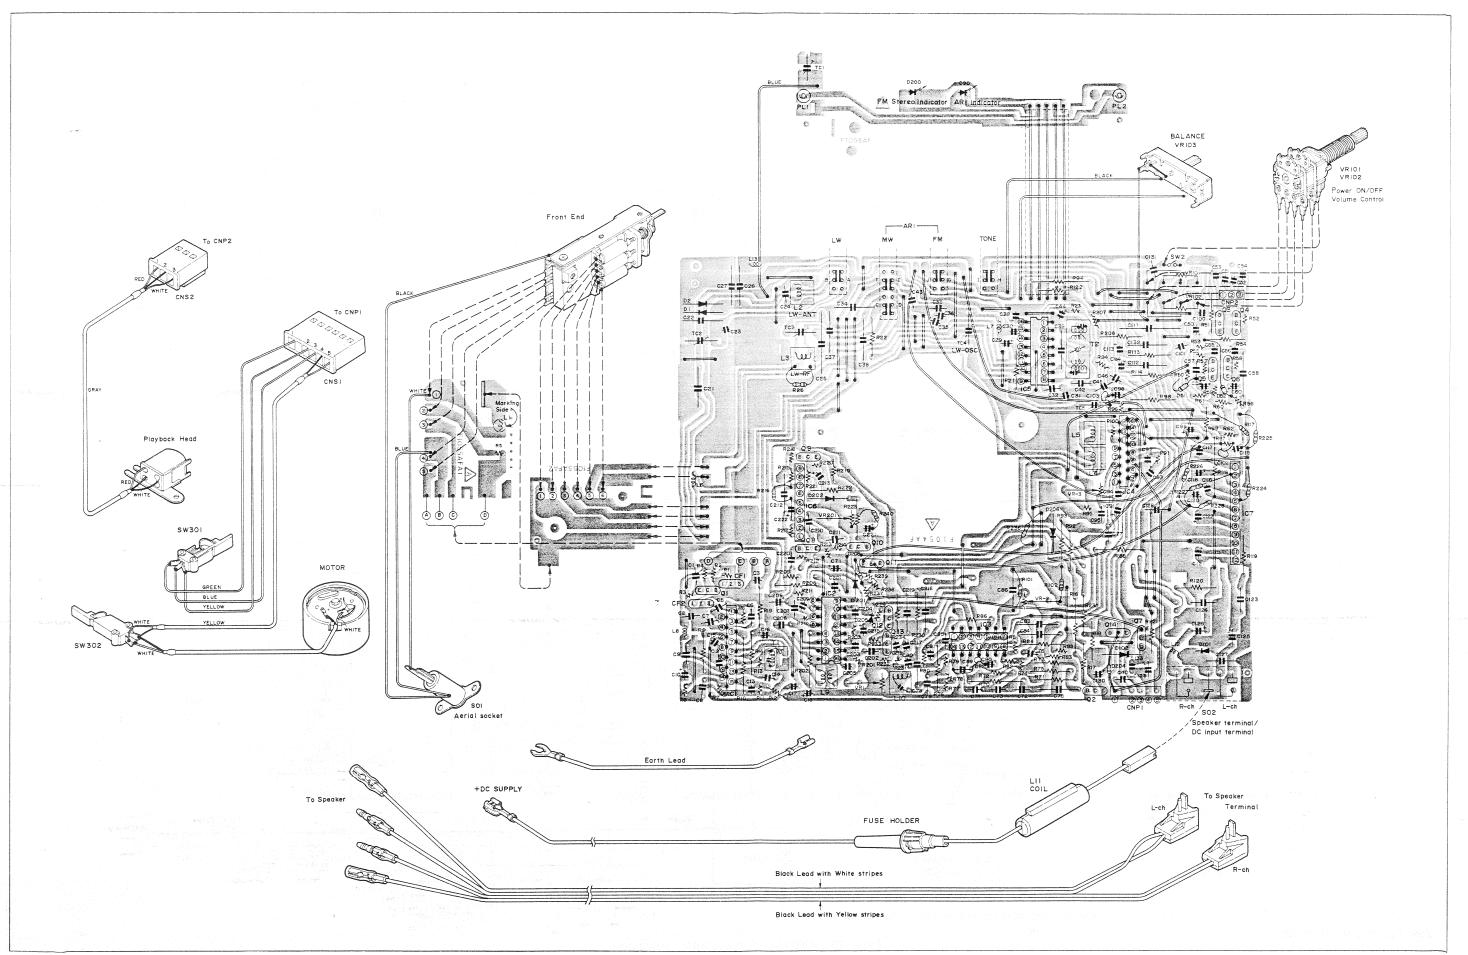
WIRING SIDE OF P.W. BOARD (RG-5900H)
